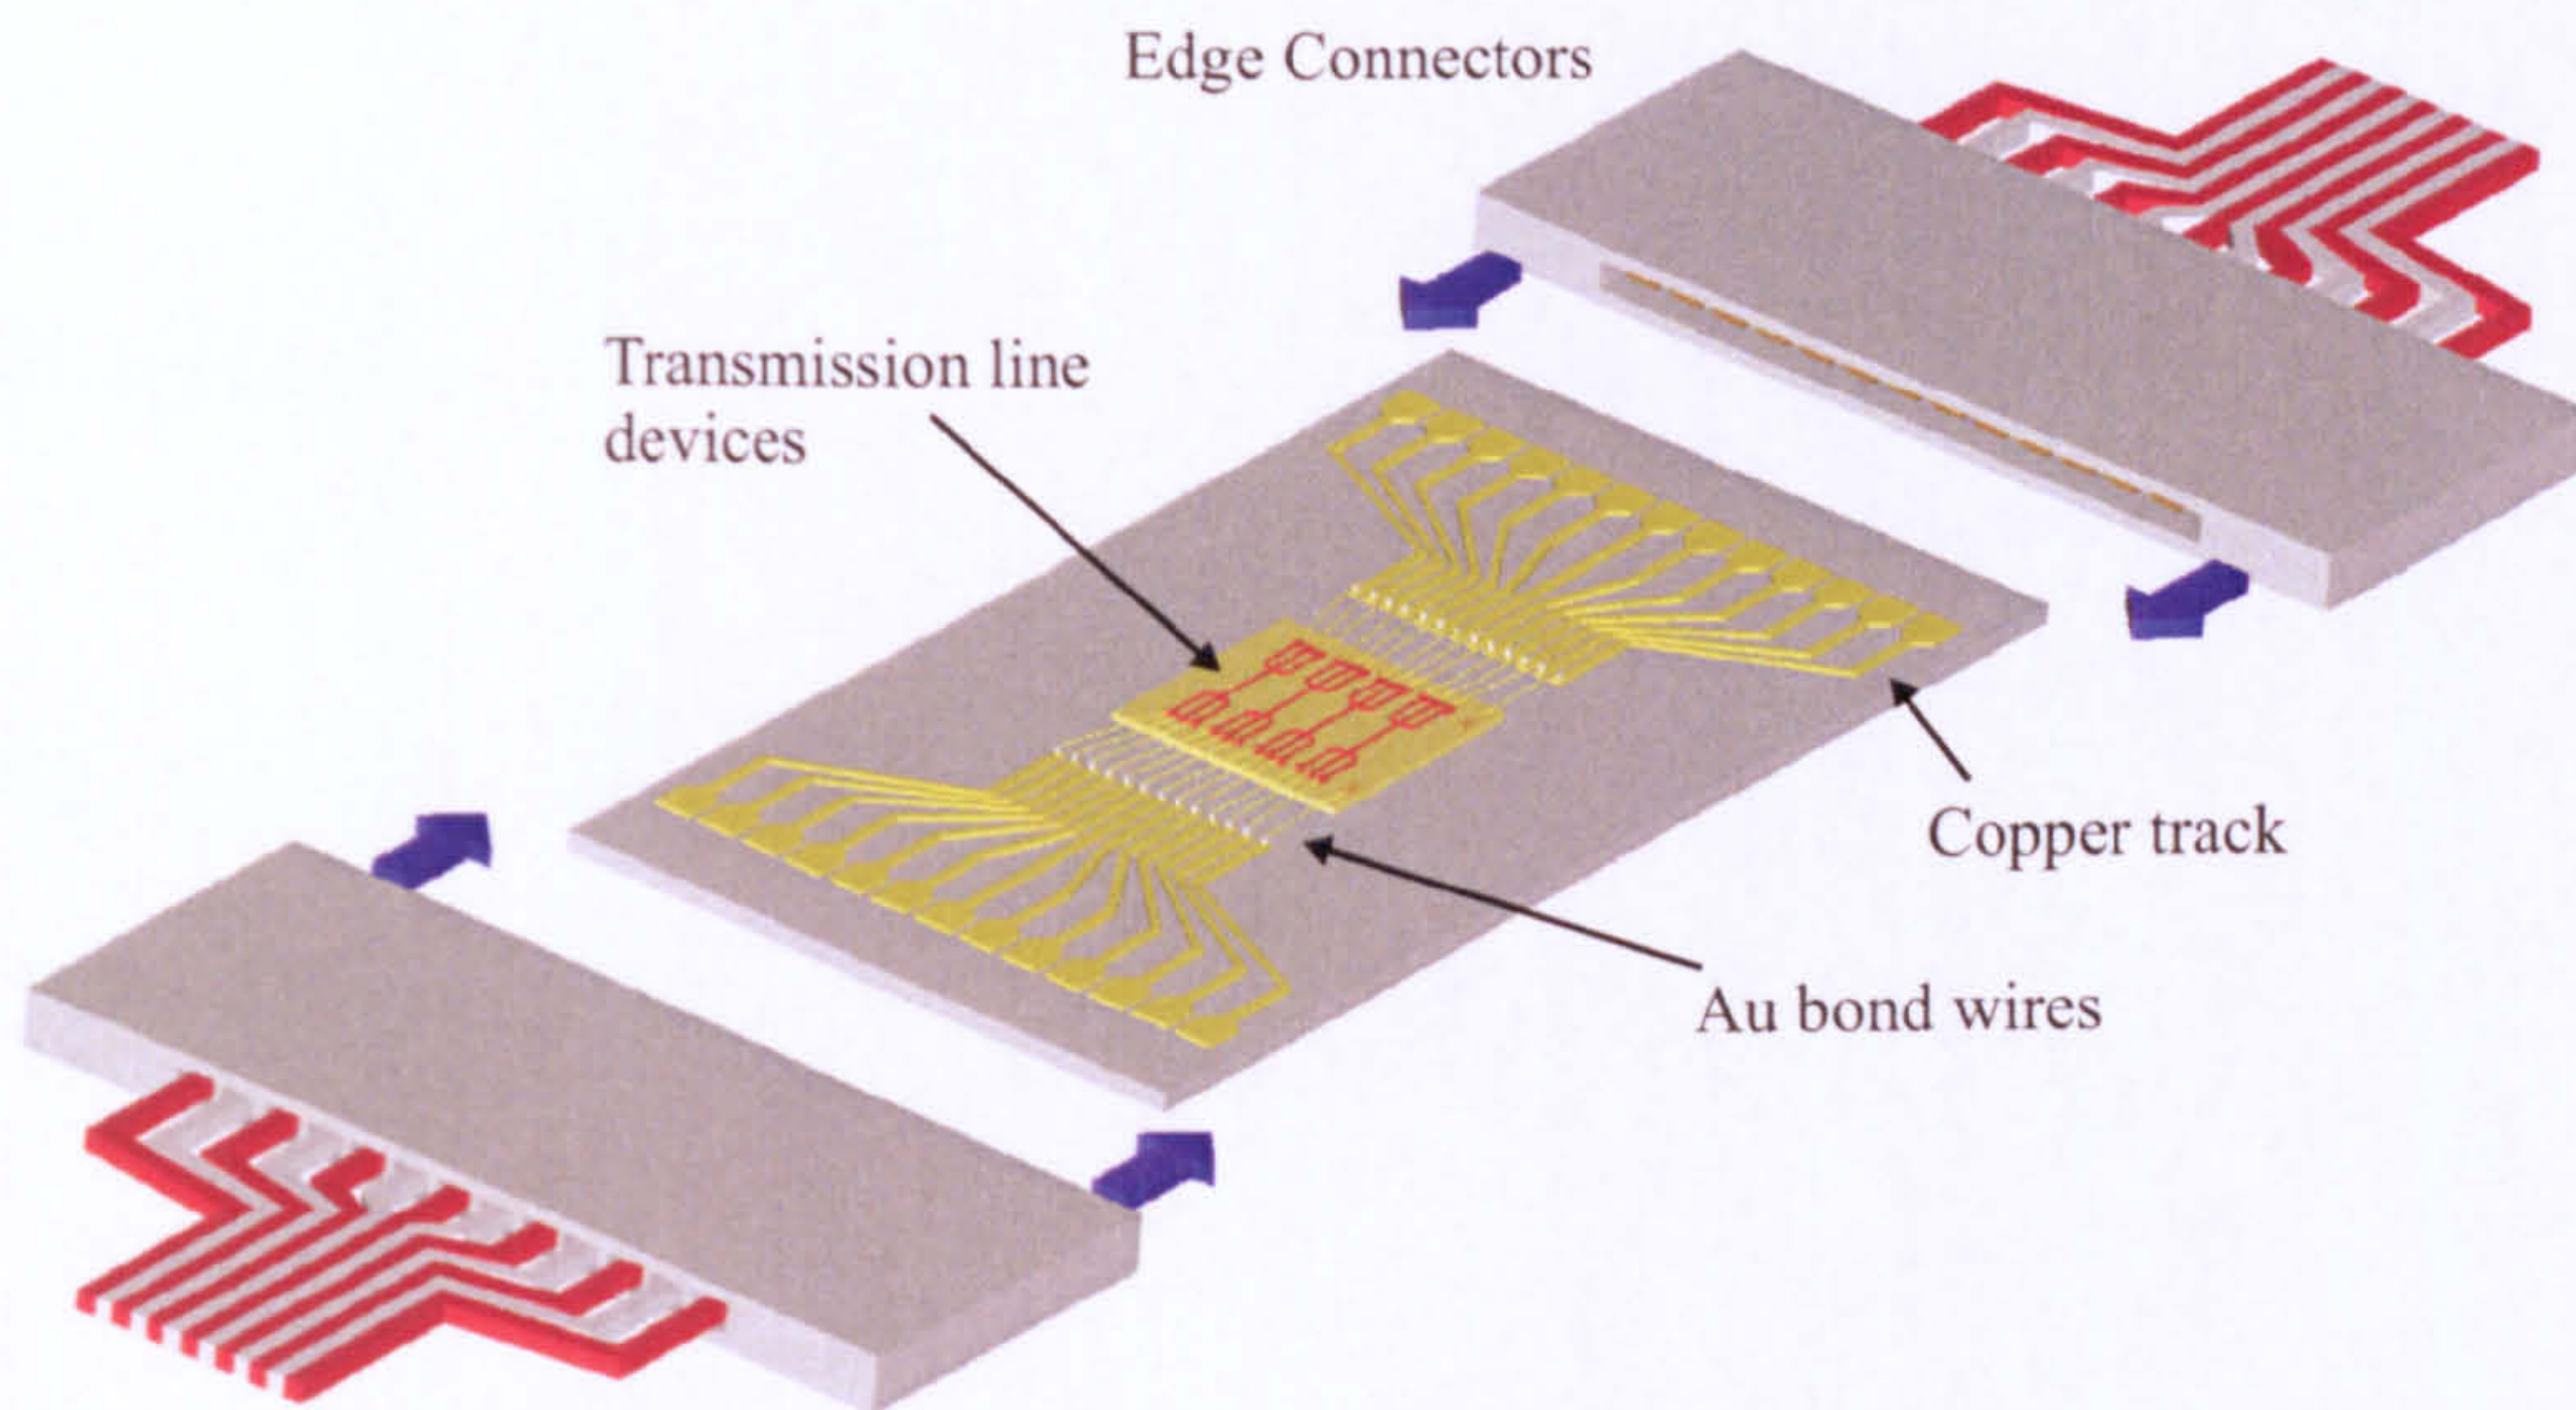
3-d representation of an on-chip, THz microstrip transmission line device mounted on a PCB distributor.
